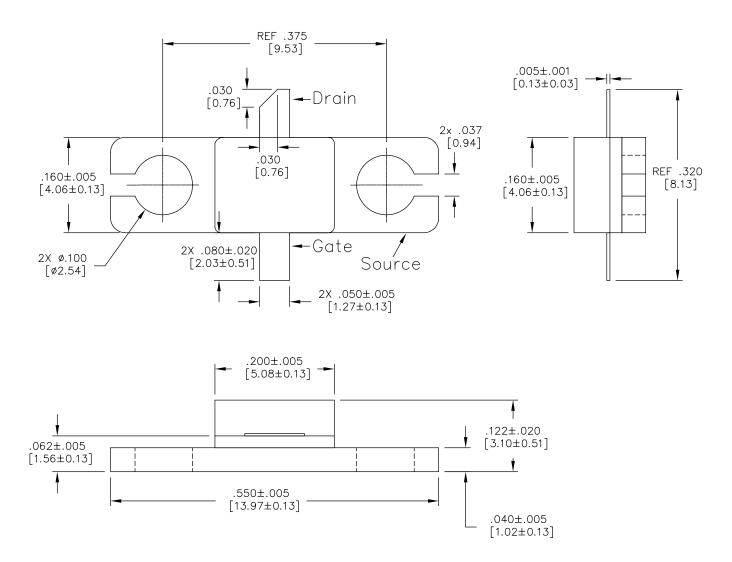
AC200B-2 Metal-Ceramic Package Dimensions and Pinout (all dimensions are in inches [mm])
